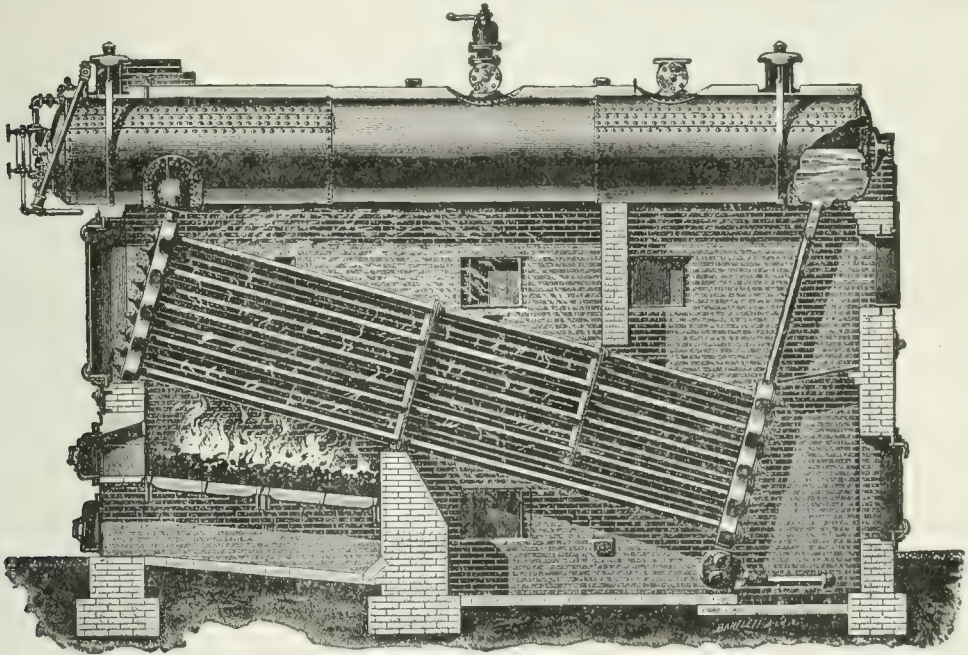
The Babcock & Wilcox Water Tube Boiler.
